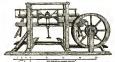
Machine-saw for cutting off the 'gunhead'. 1603.
